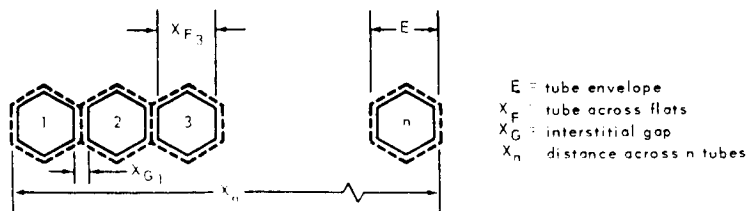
Geometry and nomenclature used in tube bundle dimensional stackup
